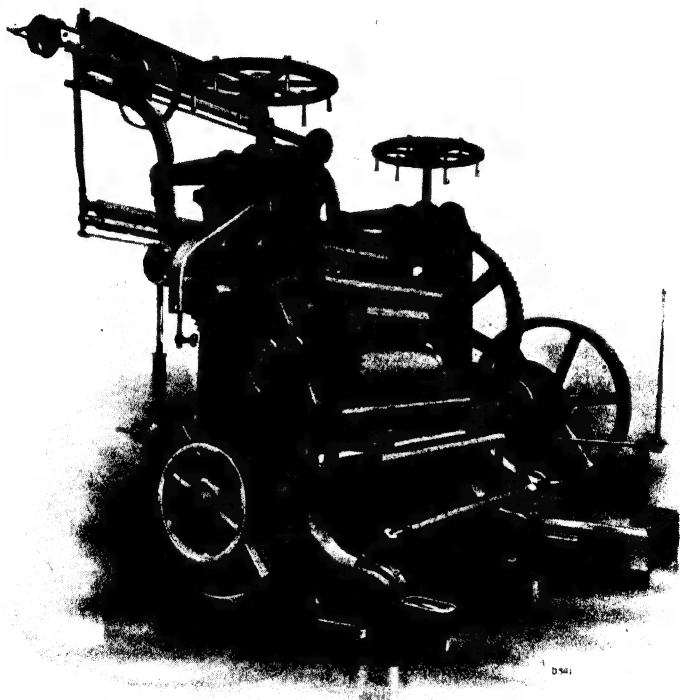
3-BOWL HEAVY FRICTION-GLAZING MACHINE
